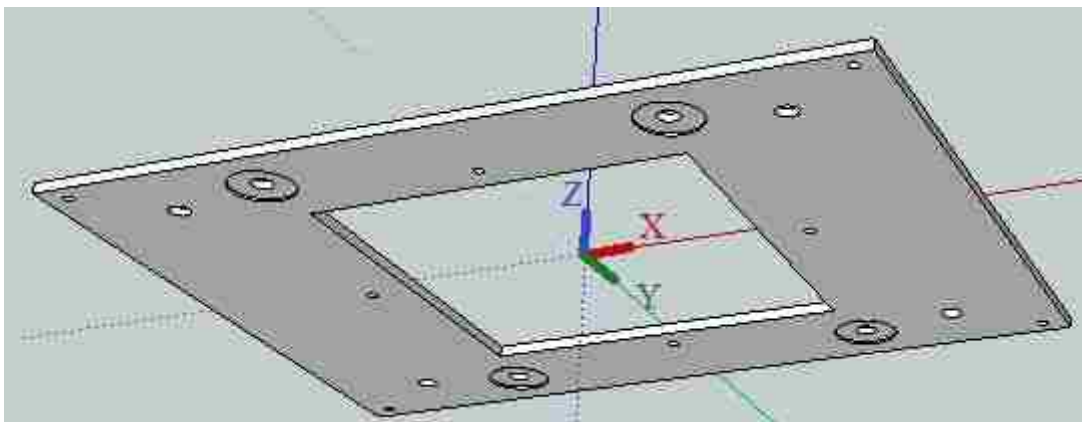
Bottom orthogonal view of the 10x10 cm² upper trimmer aluminum plate.
